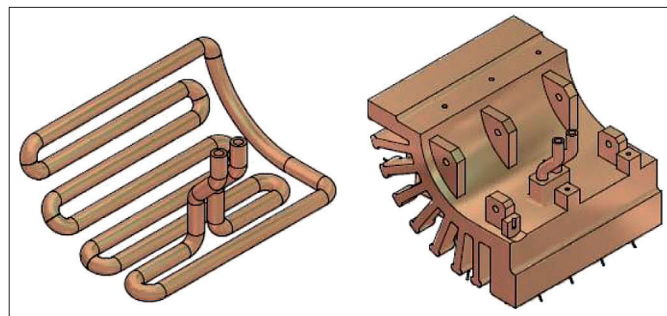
Typical construction of a copper cooler: on the left the pipe loops before casting; on the right the finished cooler (source: Mettop GmbH)
